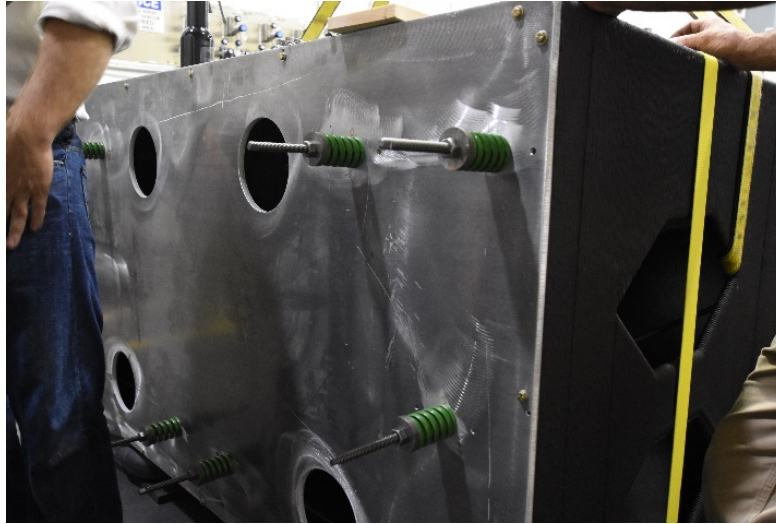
Post-tensioned mold using rods, springs, and an aluminum plate.
